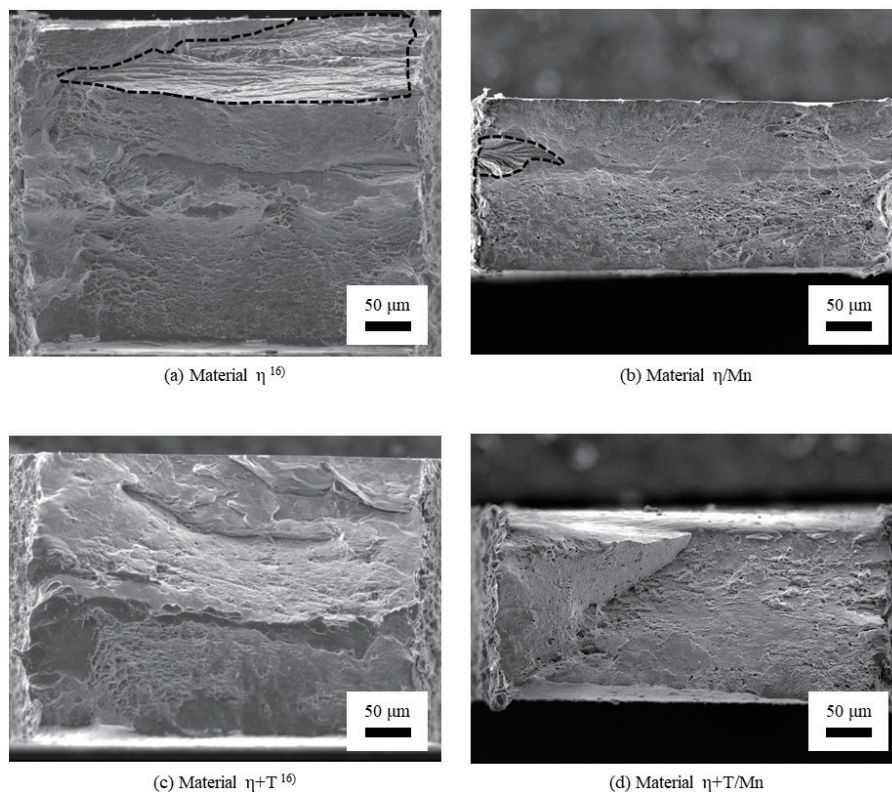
Tensile fracture surfaces for material (a) η , (b) η /Mn, (c) $\eta + T$, and (d) $\eta + T$ /Mn. Hydrogen induced quasi-cleavage cracks are indicated by dotted lines.
